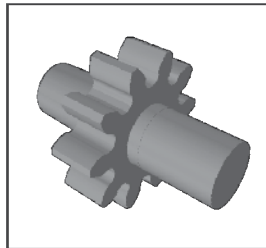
Schematic of a 2C-CIM shaft-gear wheel combination (shaft: Al_2O_3 ; gear wheel: ZrO_2).
